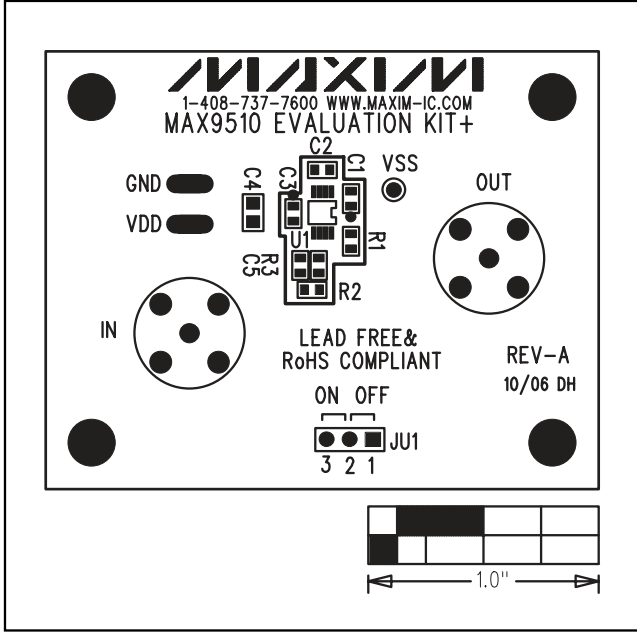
MAX9510 EV Kit Component Placement Guide—Component Side
